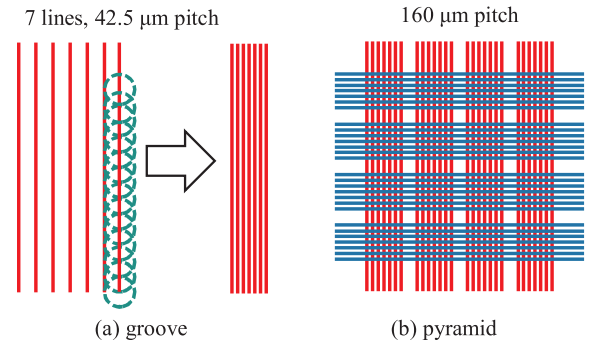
The laser irradiation scheme used for the machining of (a) a groove and (b) a pyramid structure.
